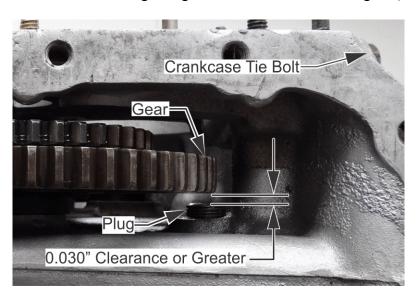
Lower Rear Oil Gallery (Control) Plug, Sandcast 1-3-5 Crankcase Half
